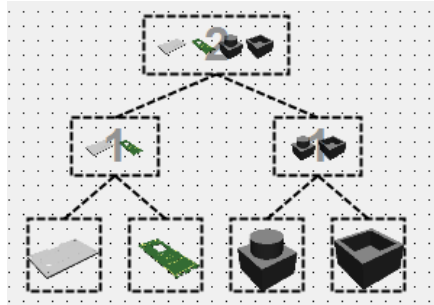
An assembly graph for a partial assembly of a cell phone. A metal plate, a shield can, is pressed onto a printed circuit board (PCB) and a cell phone camera is inserted into a socket. The camera socket is then fastened on the PCB.
